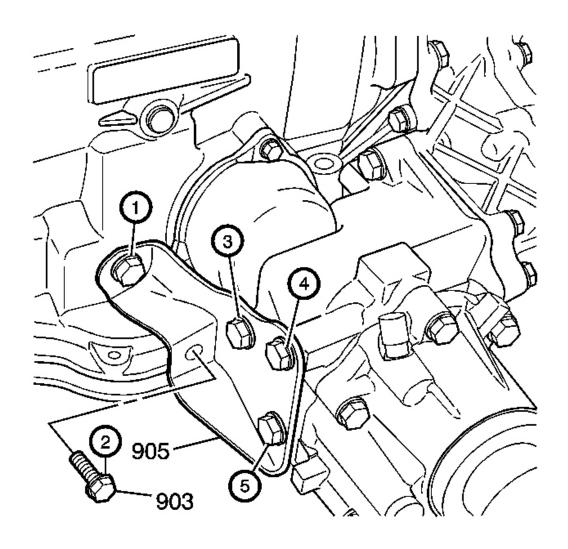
View Of Transfer Case Side Brace Courtesy of GENERAL MOTORS CORP.
